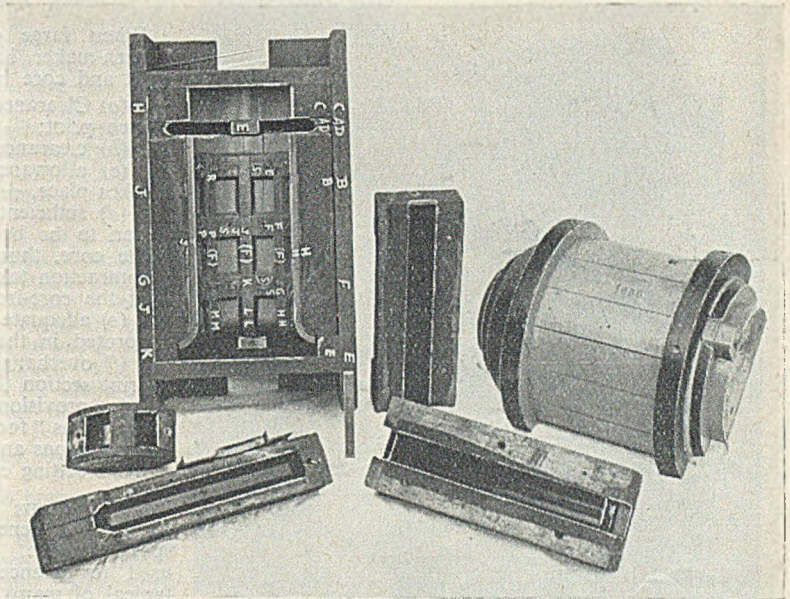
PATTERN EQUIPMENT FOR A ROLLING MILL, BOTTOM CHOCK.
